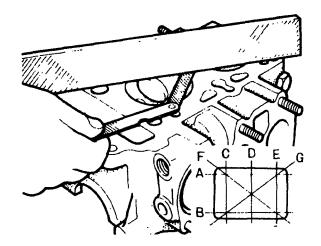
CHECKING CYLINDER HEAD DISTORTION
